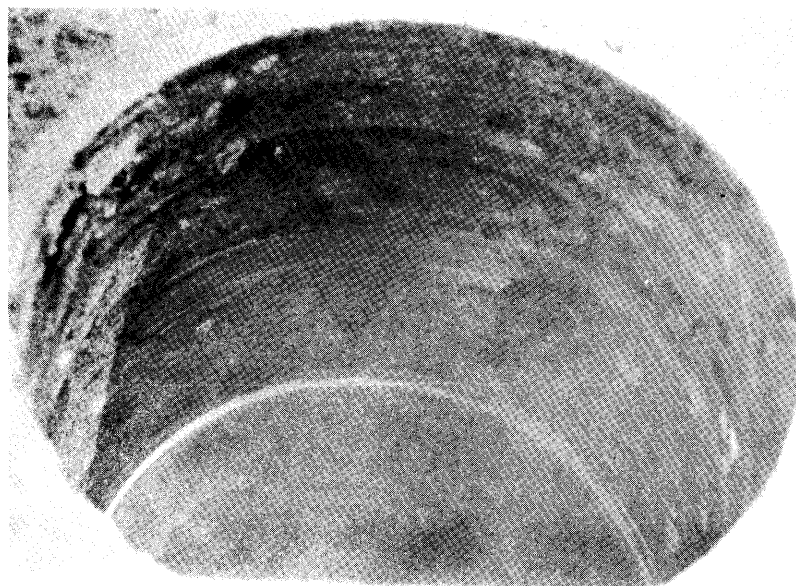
Cross section view of the spot showing tiny cracks originating from the rusted steel.
